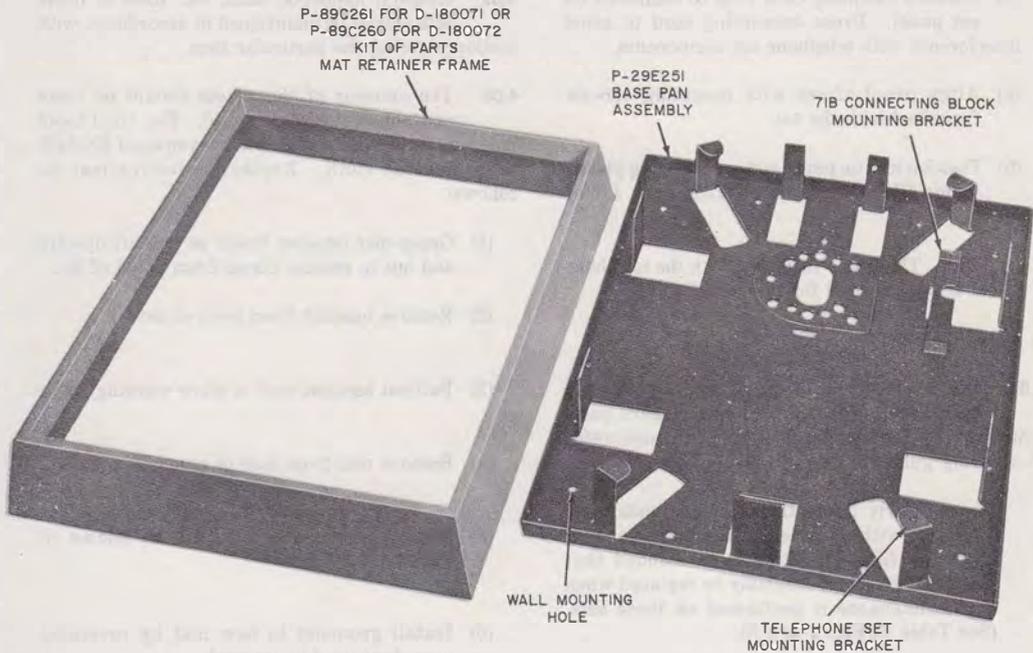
D-180071 or D-180072 Kit of Parts for Surface Mounting
